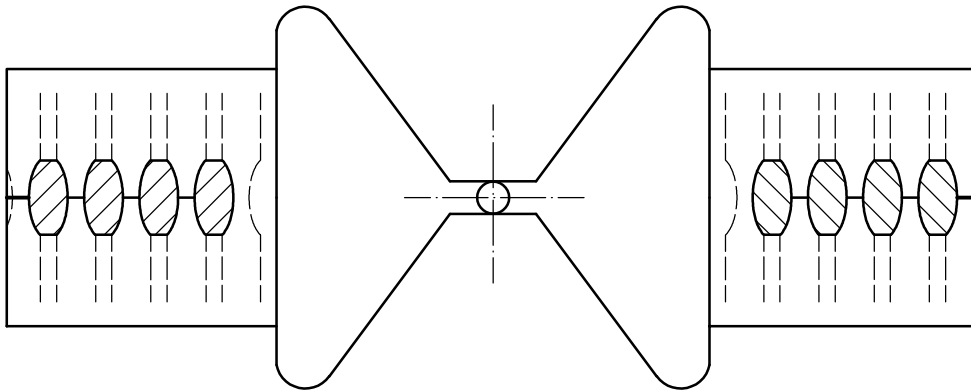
Moulding produced using multiple inserts (hatched), showing the locations from where tensile specimens can be taken (dashed lines)
